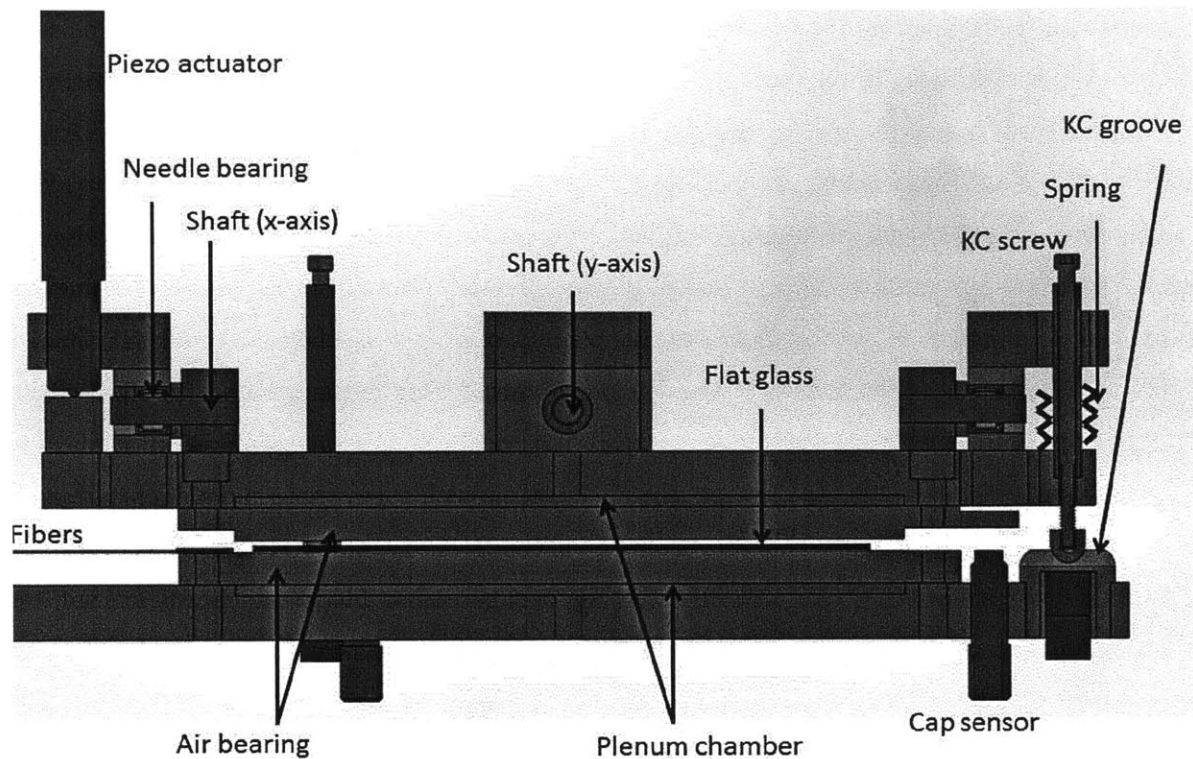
Solidworks cross-sectional view of 2D shear testing device.
